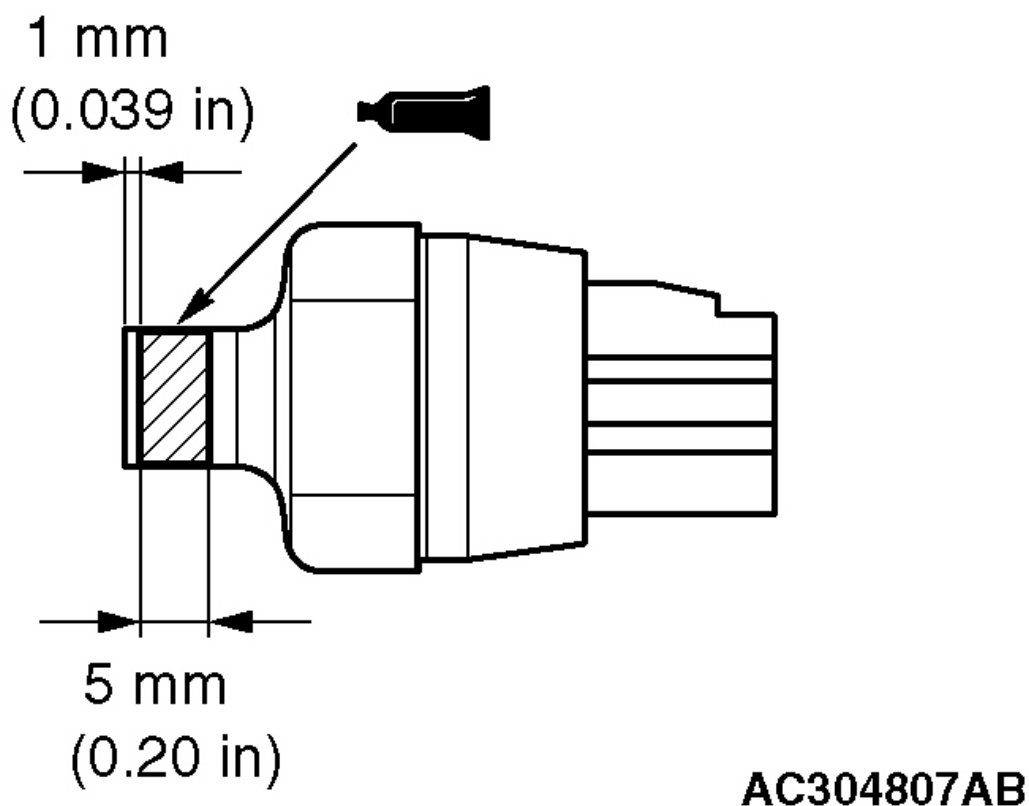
Applying Sealant To Engine Oil Pressure Switch Threads
